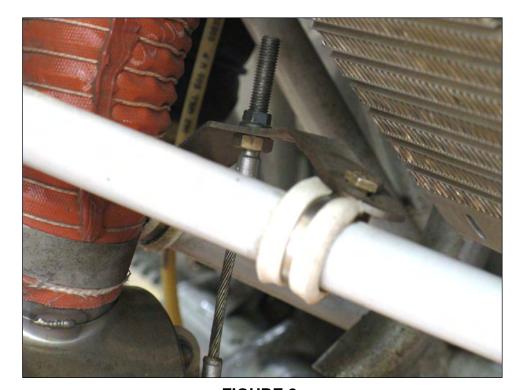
EXHAUST SUPPORT STRAP INSTALLATION DETAIL
